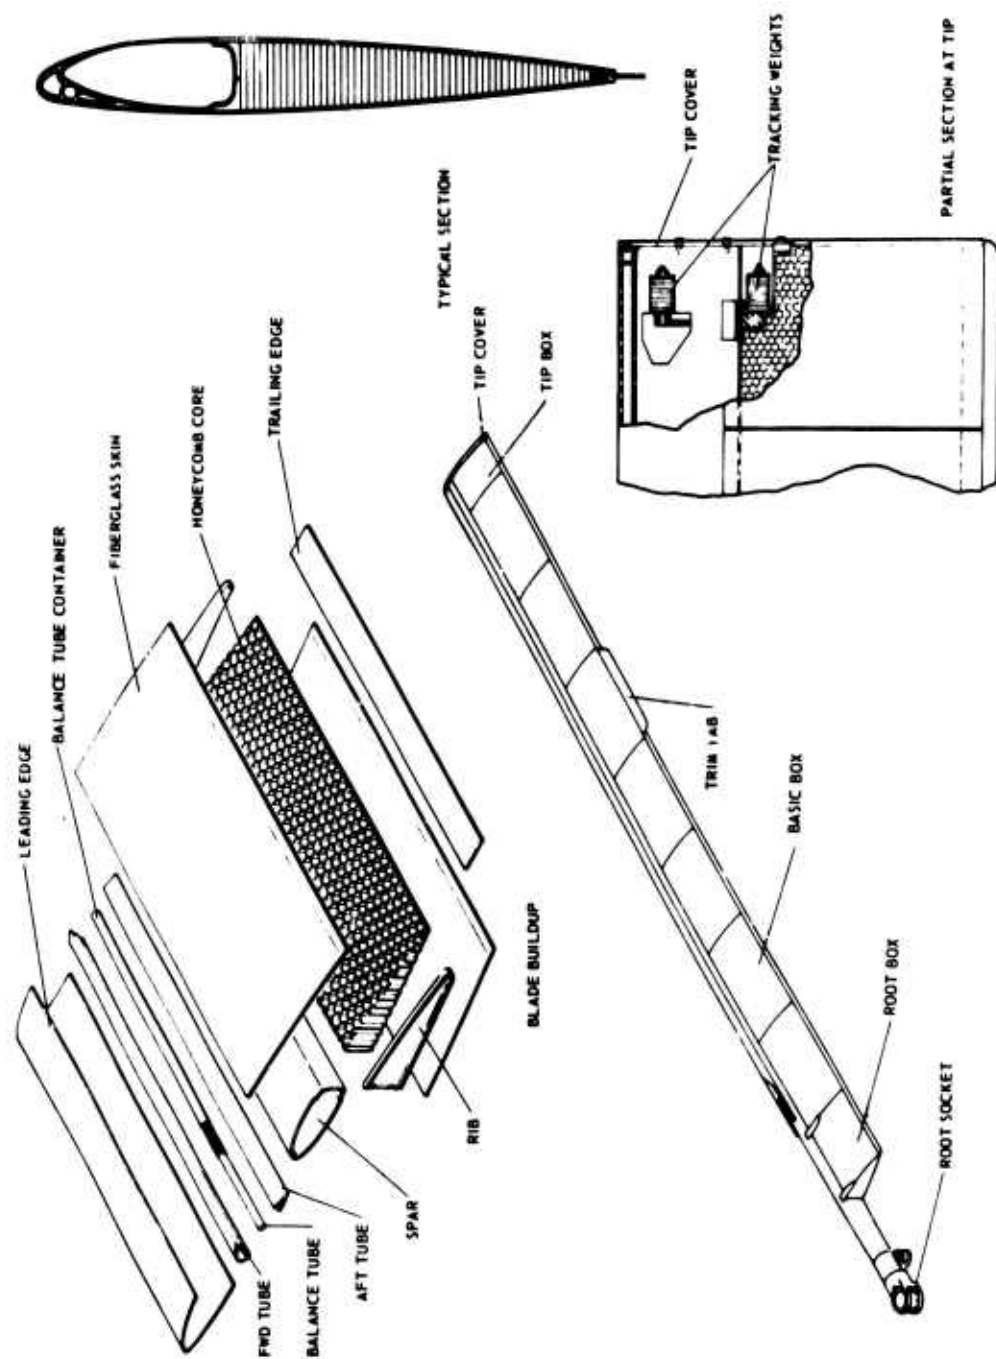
CH-47B/C ROTOR BLADE ASSEMBLY.
